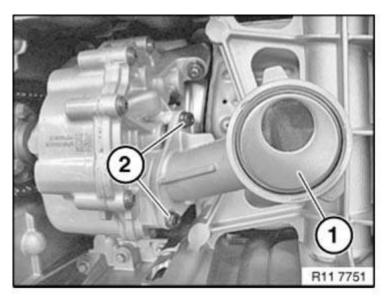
Identifying Intake Pipe And Nuts Courtesy of BMW OF NORTH AMERICA, INC.
